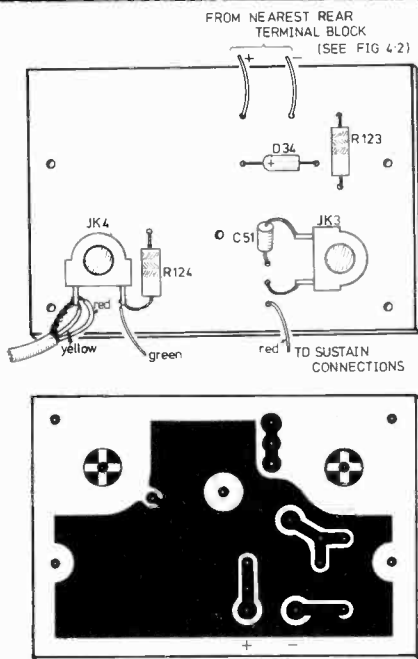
Component layout and printed circuit details for pedal socket p.c.b.
